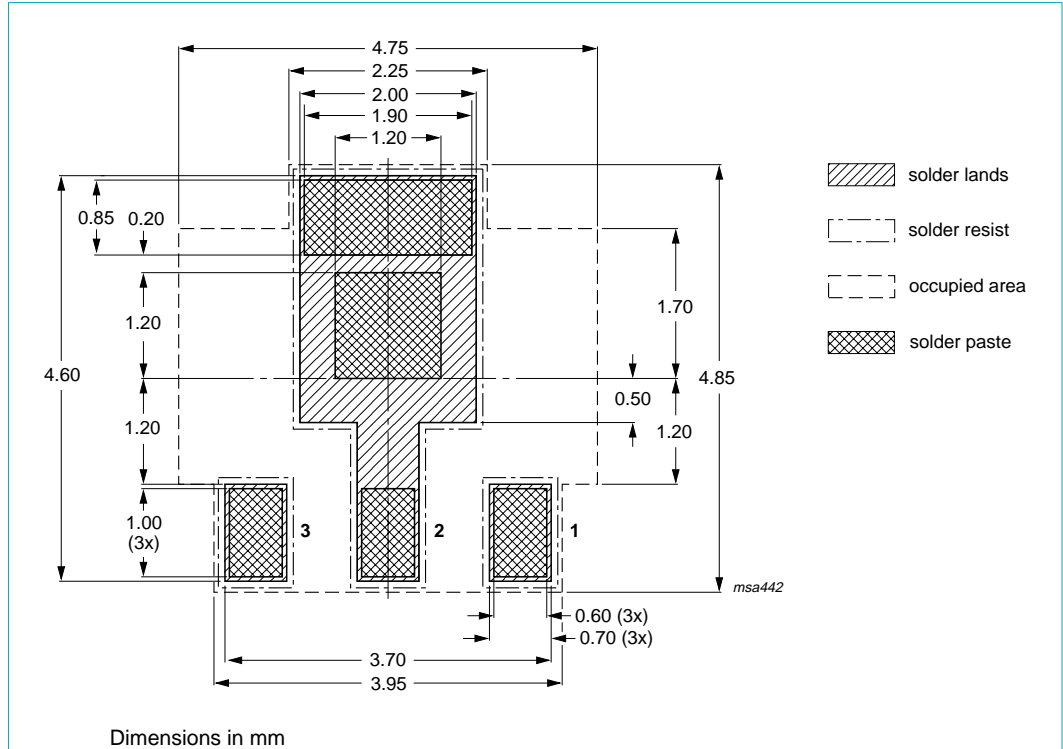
Reflow soldering footprint SOT89 (SC-62)
